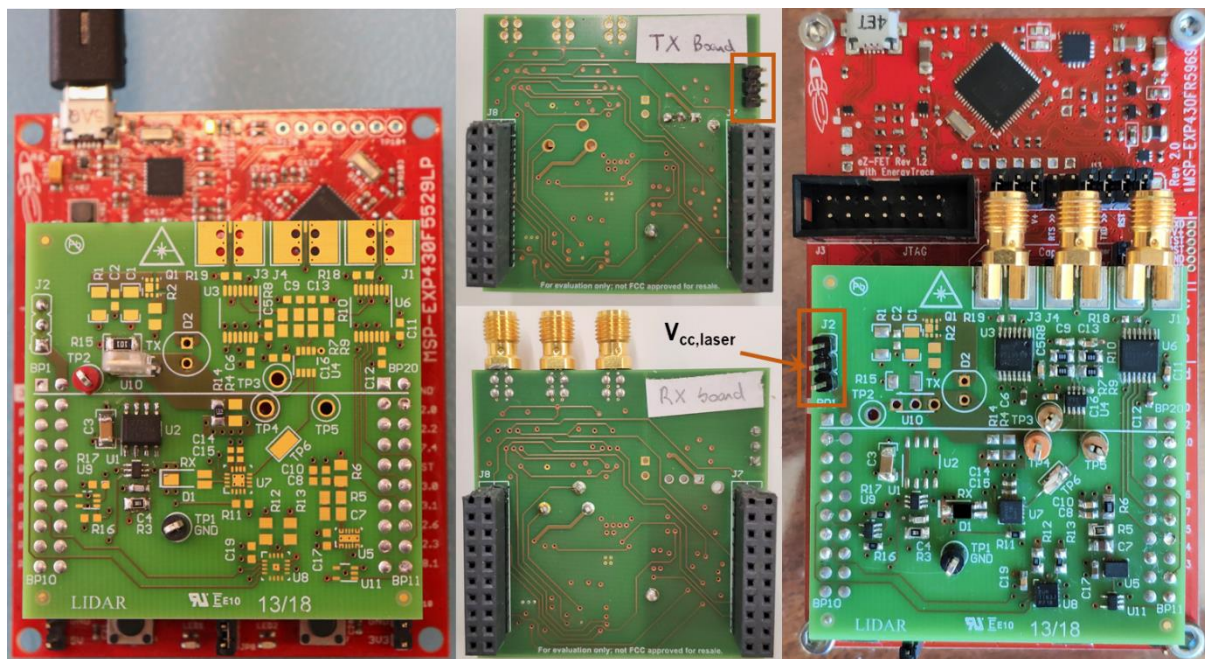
LiDAR final boards. On the left, the TX PCB mounted on the TX MCU. On the center, the backsides of both PCBs. On the right, the RX PCB mounted directly on the RX MCU. The headers to connect the external power source are highlighted by the orangish rectangles.
